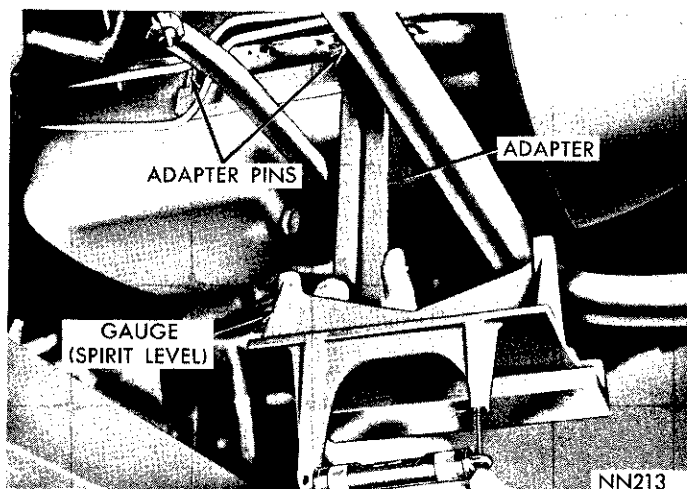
Adjusting Gauge on Engine (Front Joint Angle Reference)
